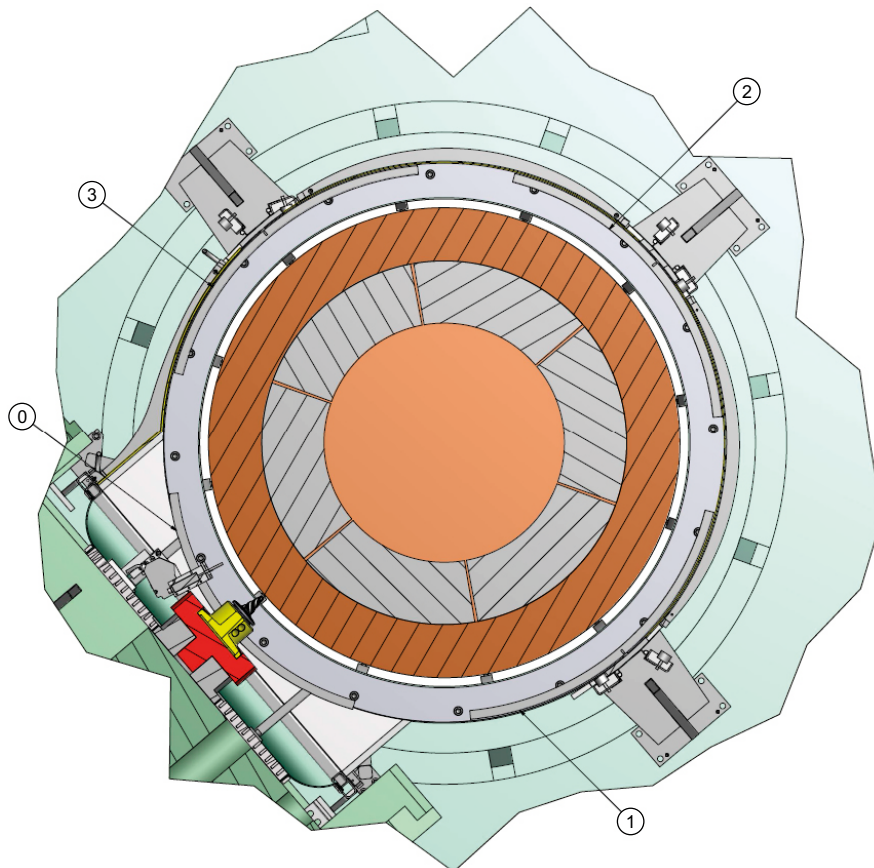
A cut-away view of the gas shield from above showing the placement of the gas distributors. The numbers refer to the numbering of the distributors throughout this report. Distributor 0 is located at the welding head, and the others are numbered counter clockwise from this position, as indicated in the diagram.
